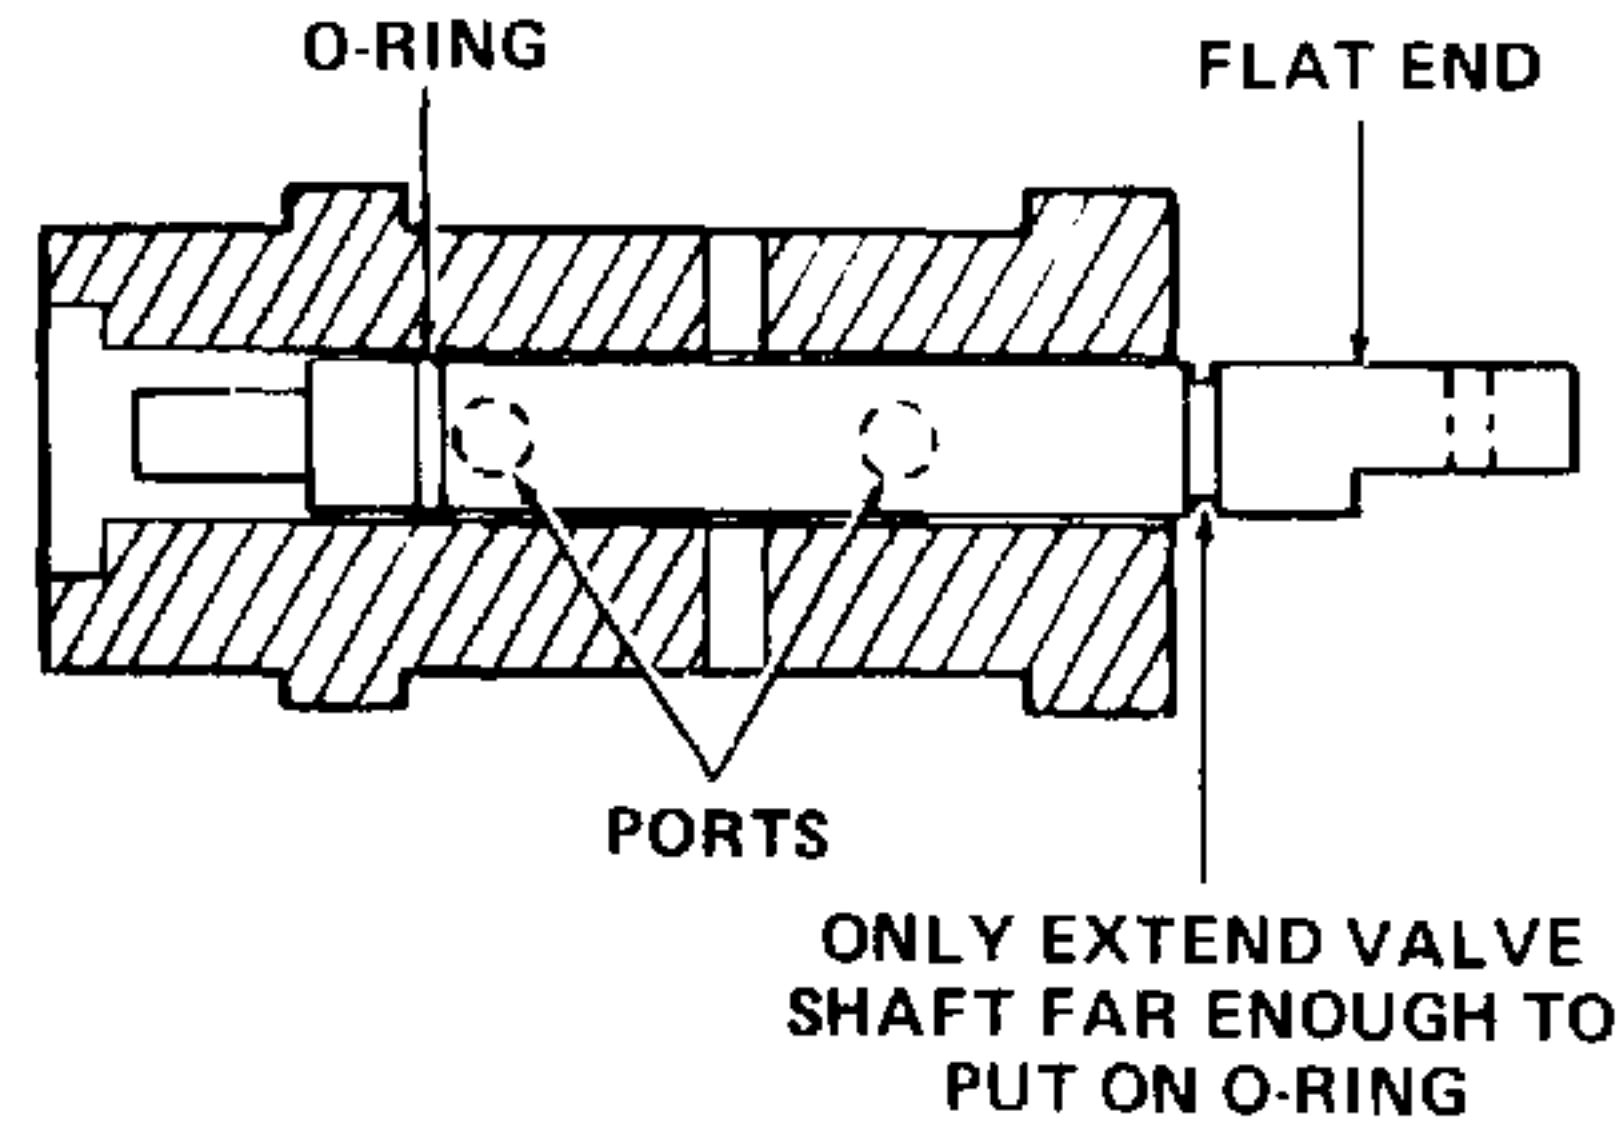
A. Placement of O-Rings on Valve Shaft.
